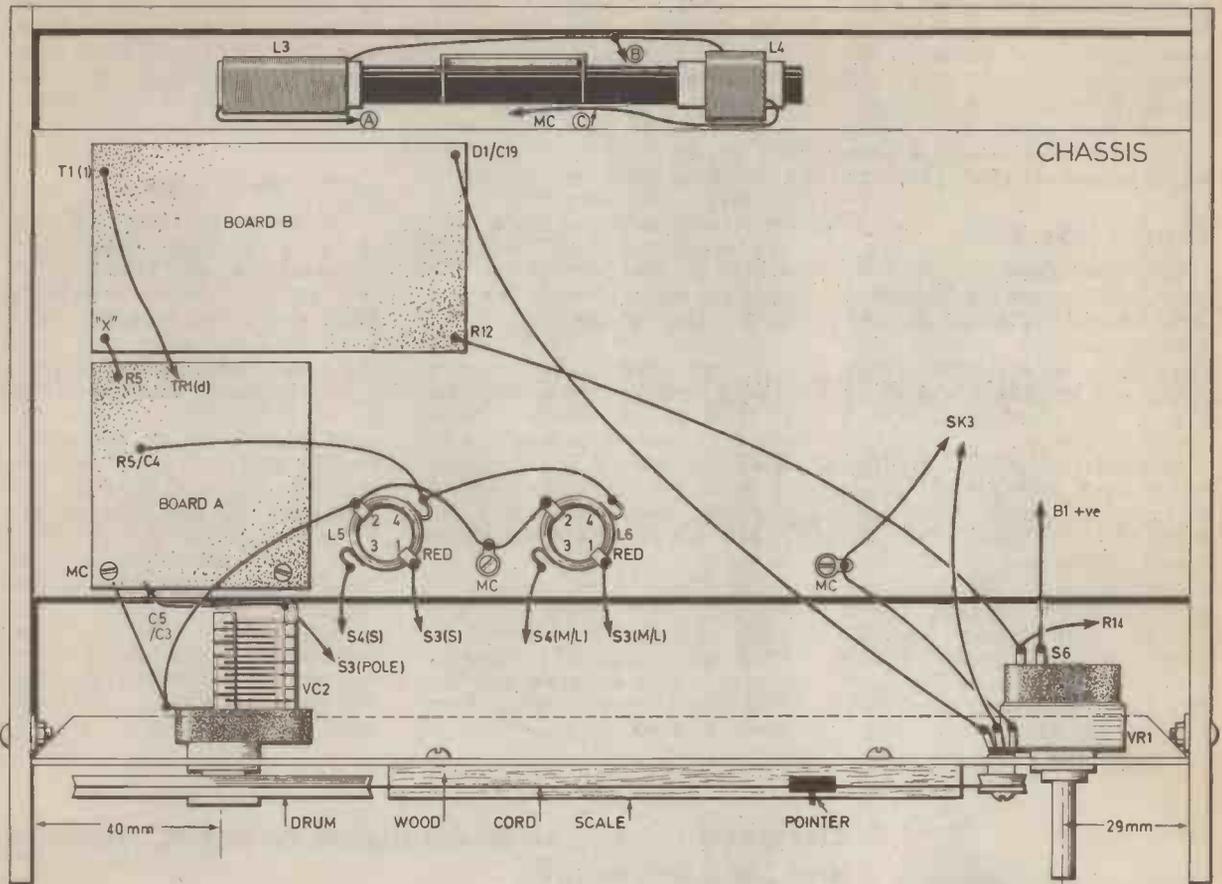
Topside view showing position of component boards. Note that Wearite coils are shown as used in the prototype.
